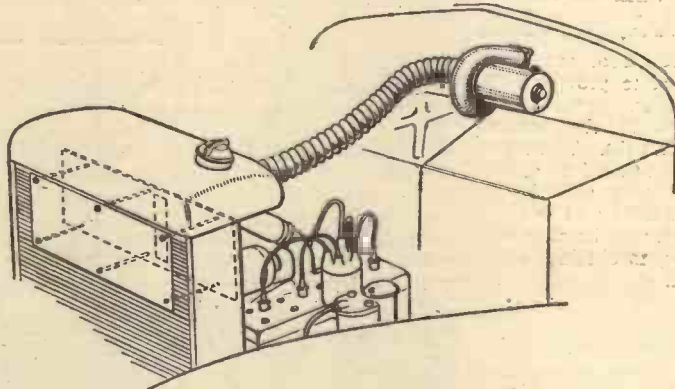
General view of the completed heater, showing the position of the front baffle plate.
